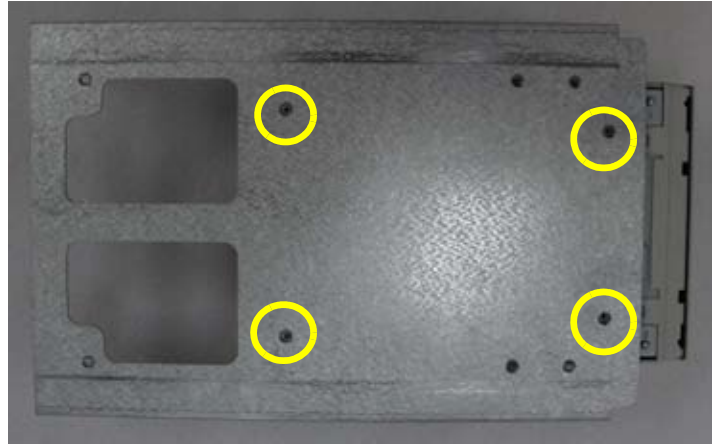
Fix BW PRINTER to COLOR PRINTER BRKT POLARIS with 4 screws (2306562, FH M3X6)
